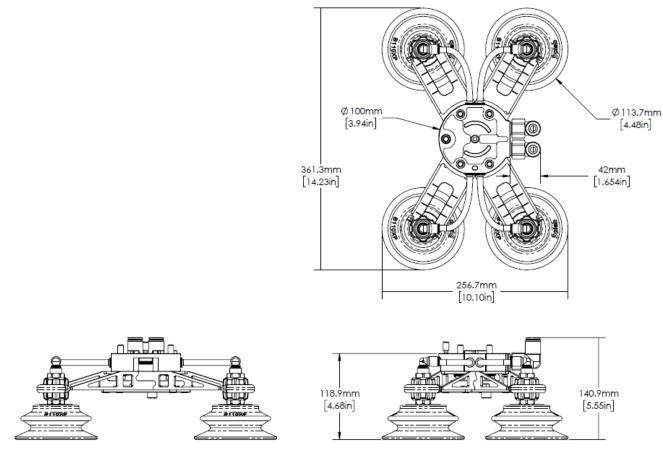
Technical Dimensions of PowerPick20 Gripper (Default Configuration)
